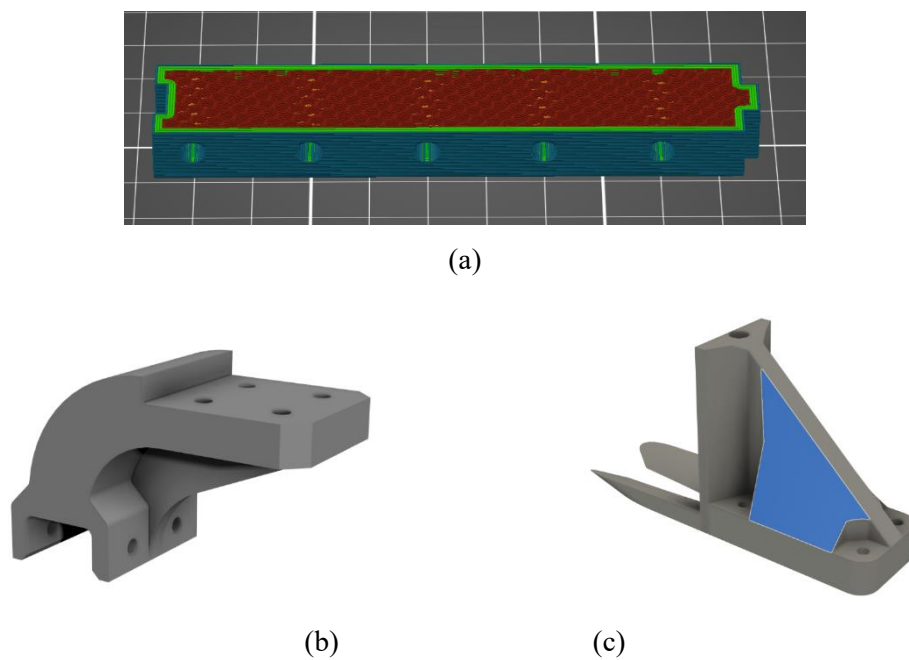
(a) FDM modular rail element showing 3D print infill (b) SLA modular Rail-Platform bracket (c) FDM thruster mount.
